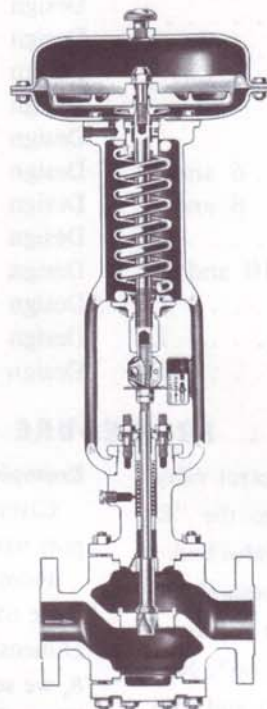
Type 667-A control valve with single port, top, and port guided Micro-Flute valve plug.
